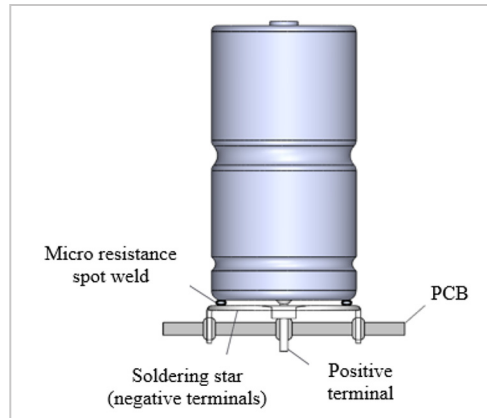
Soldering Star Capacitor Welded on a PCB (printed circuit board).
